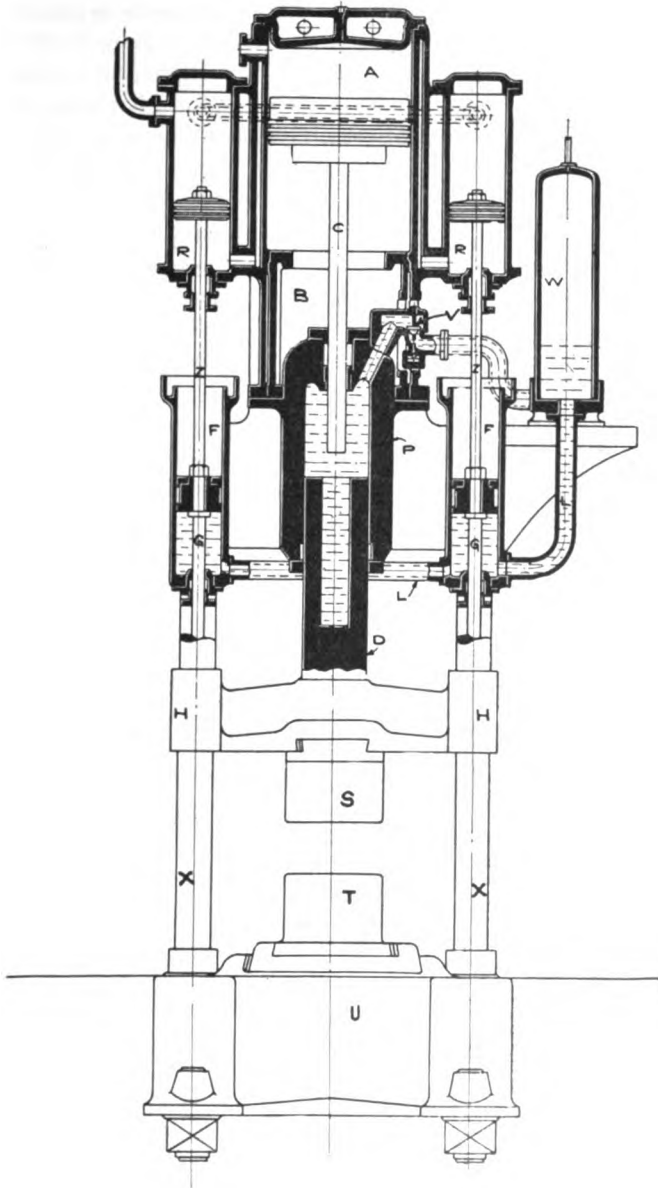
STEAM-HYDRAULIC FORGING PRESS
